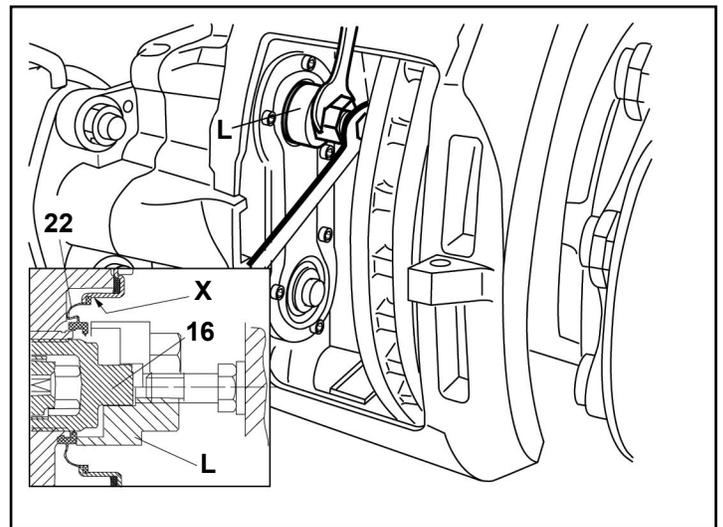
ON-VEHICLE INNER SEAL INSTALLATION
